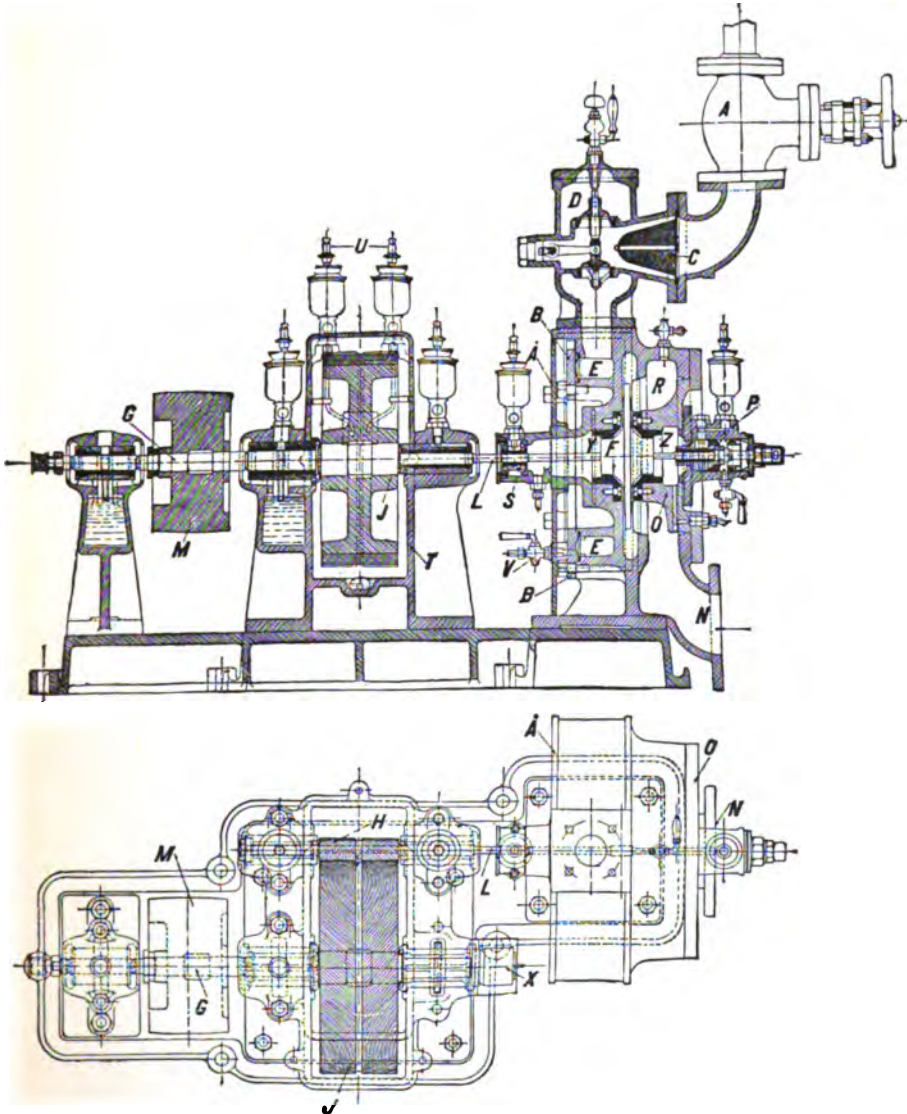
Sectional Elevation and Plan of De Laval Steam-Turbine
